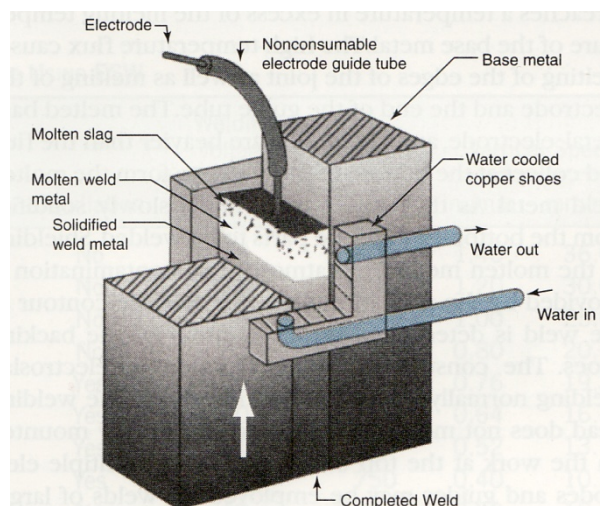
A schematic representation of an electroslog welding.
